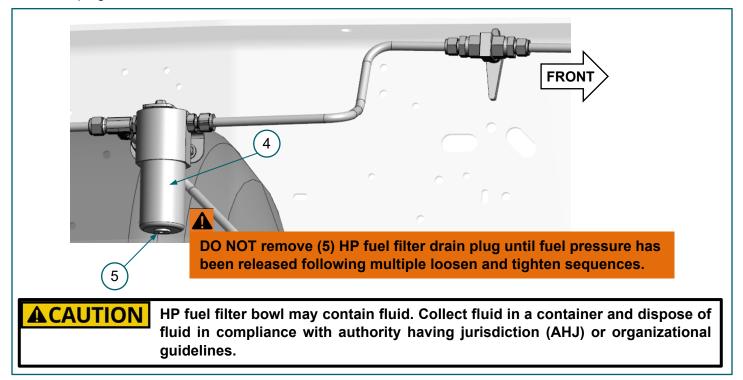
(4) HP fuel filter assembly, (5) drain plug
